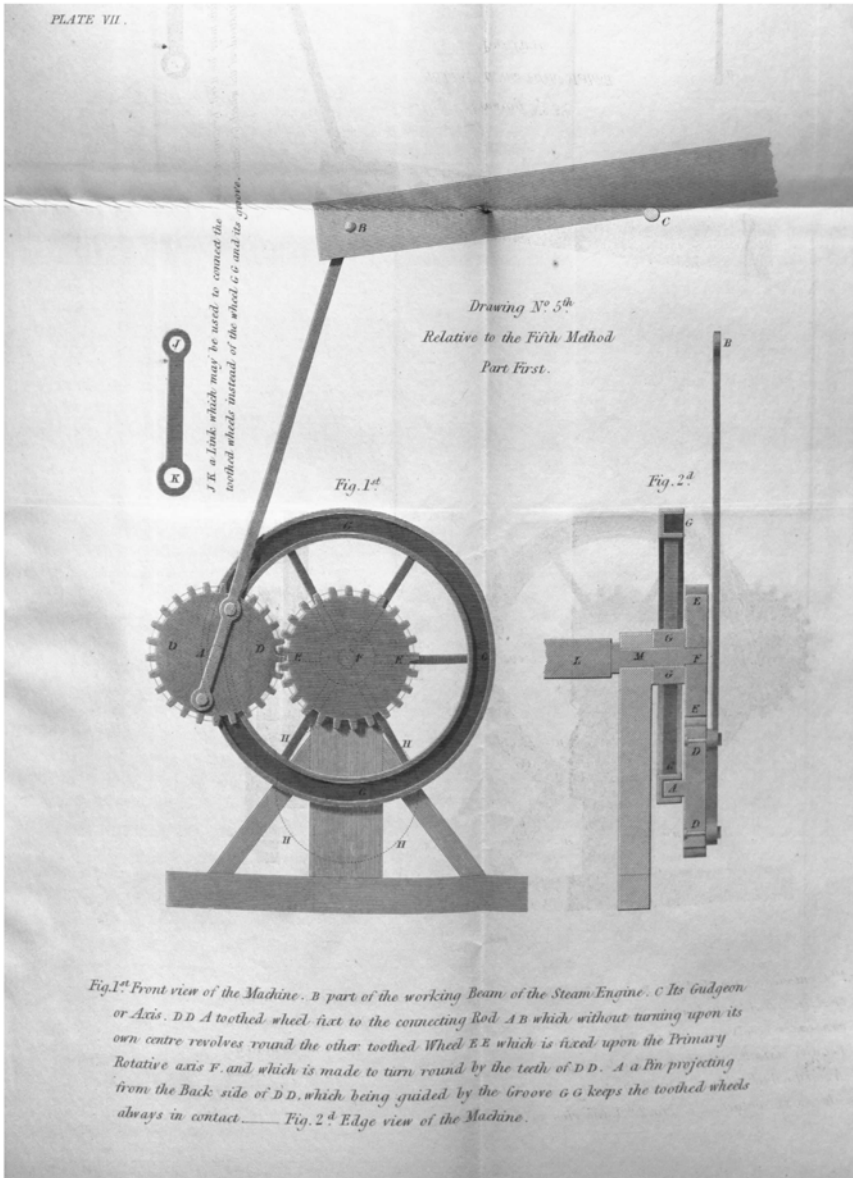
The sun-and-planet gearing. (British Patent 1306, October 25, 1781).
